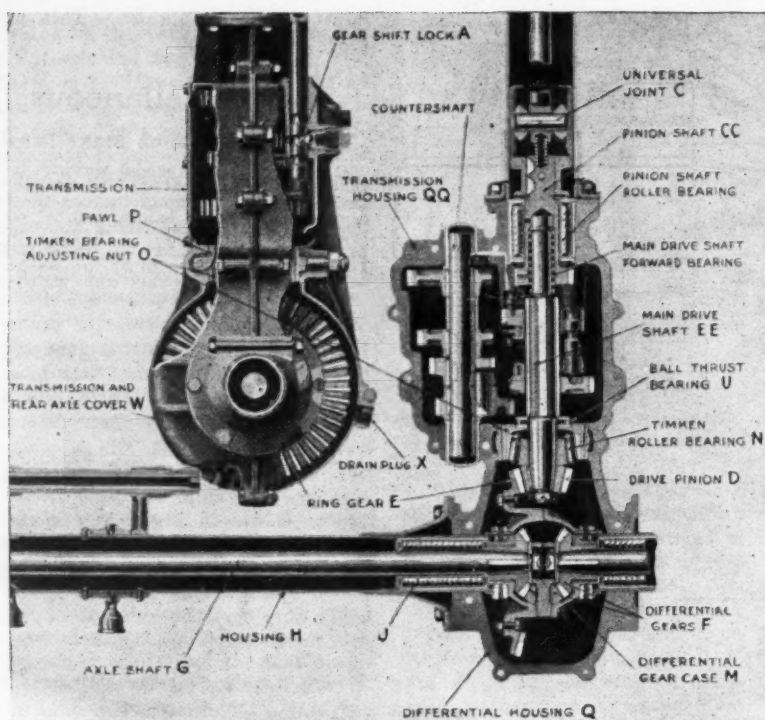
Sectional view of Studebaker rear axle, showing pinion and ring gear adjustments
